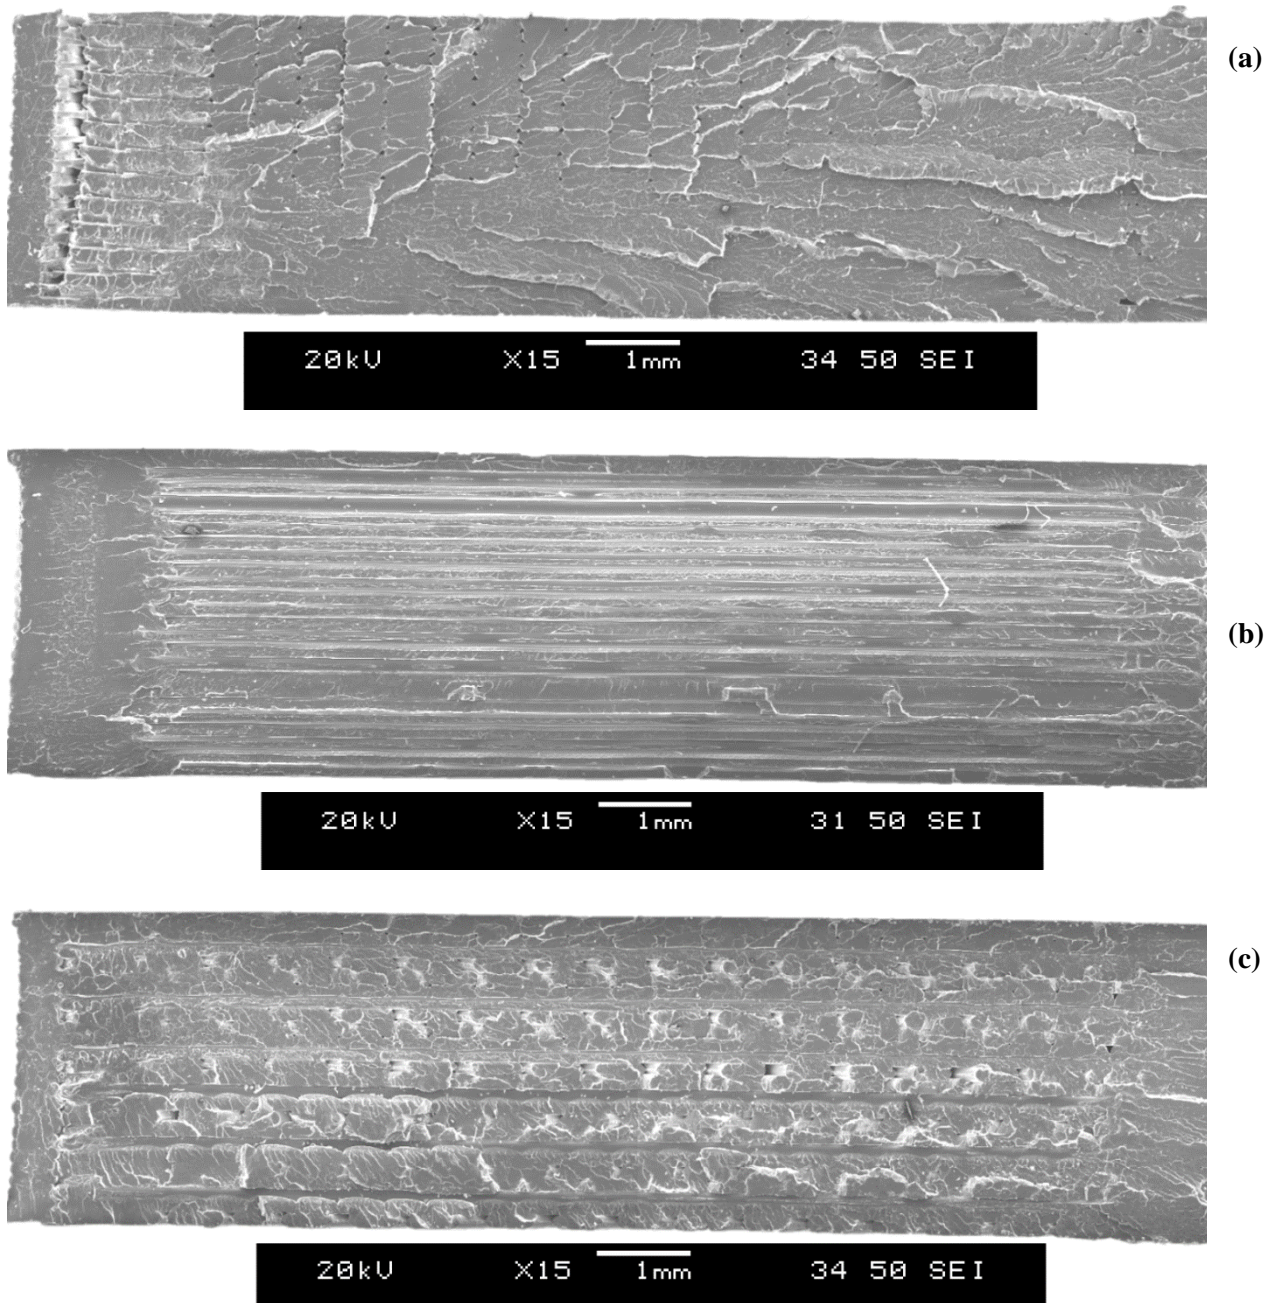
SEM imaging of fracture surface of specimens without defects: (a) specimen A; (b) specimen B; (c) specimen C.
